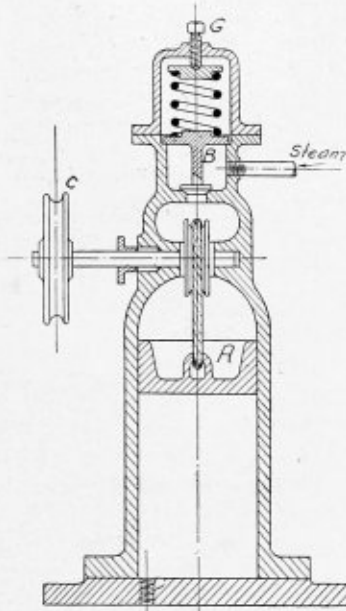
COMMON FORM OF DAMPER REGULATOR.
